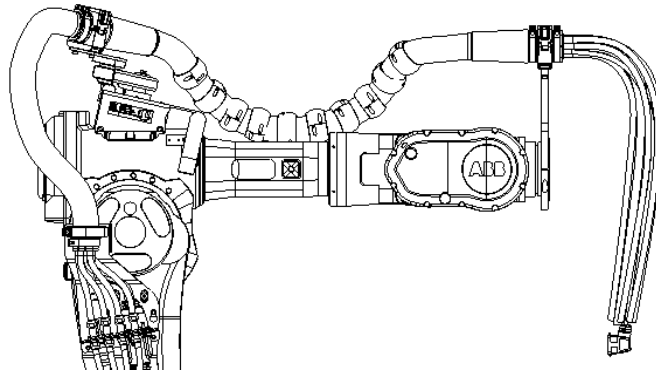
"Orange line" DressPack Upper arm right arm side view Spot Welding version.
